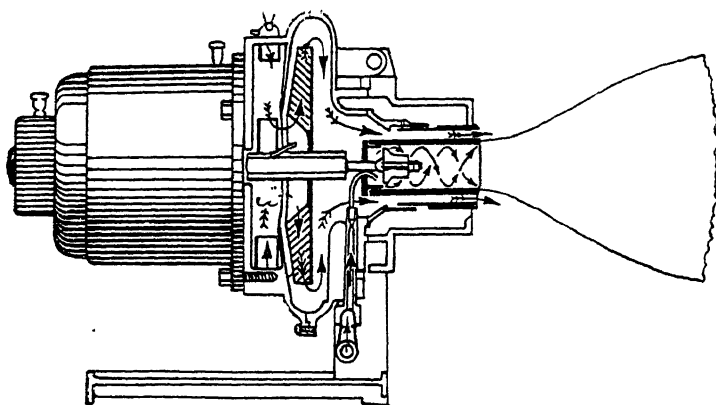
HORIZONTAL ROTATING-CUP OIL BURNER
